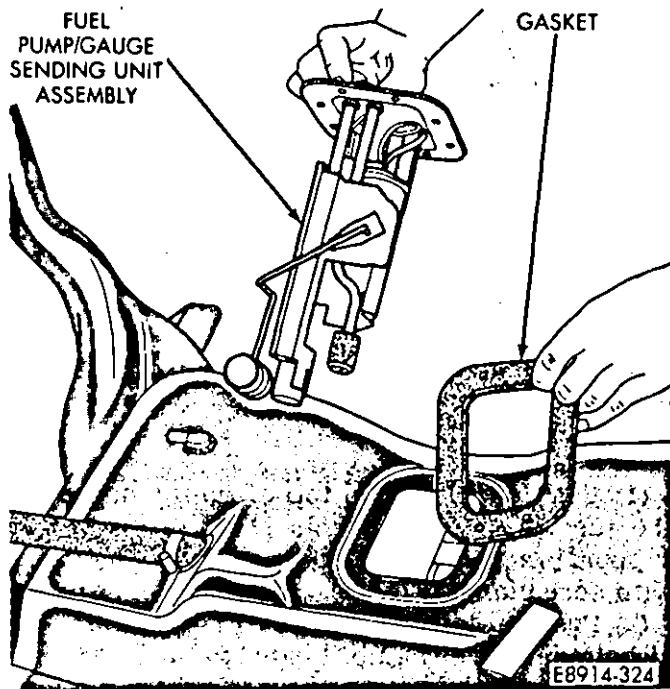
Fuel Pump/Gauge Sending Unit Removal/Installation
